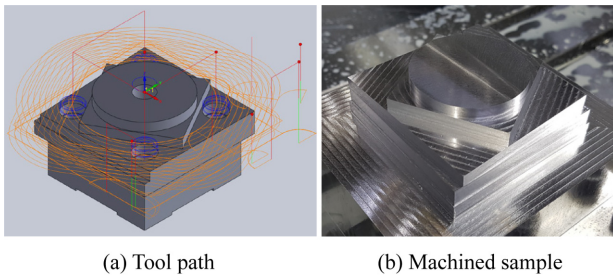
The tool path and machined result of ISO10791-7 M1 80 test specimen
